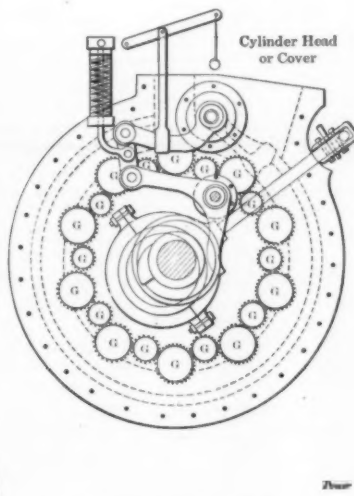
EXTERIOR VIEW OF CYLINDER HEAD.
